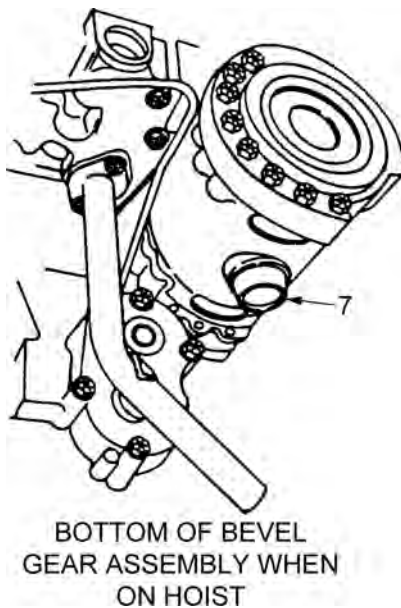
Bevel Gear Machined Boss Must Align with Pedestal on Center Housing.
